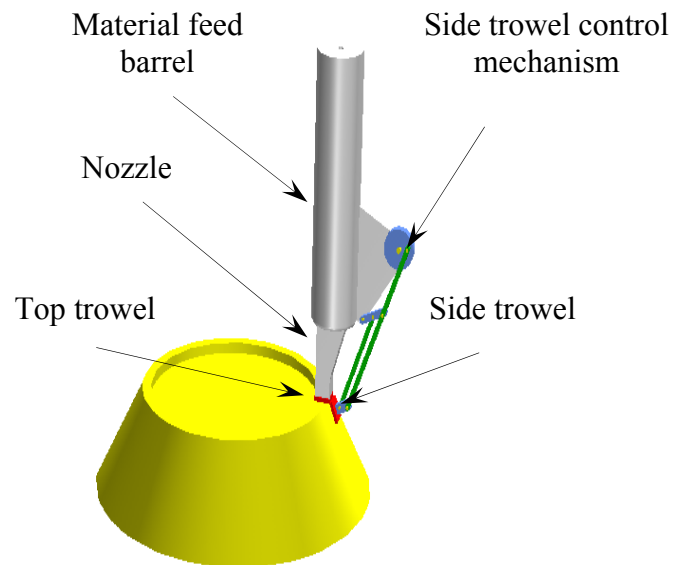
Schematic view of extrusion assembly of a contour crafting machine
